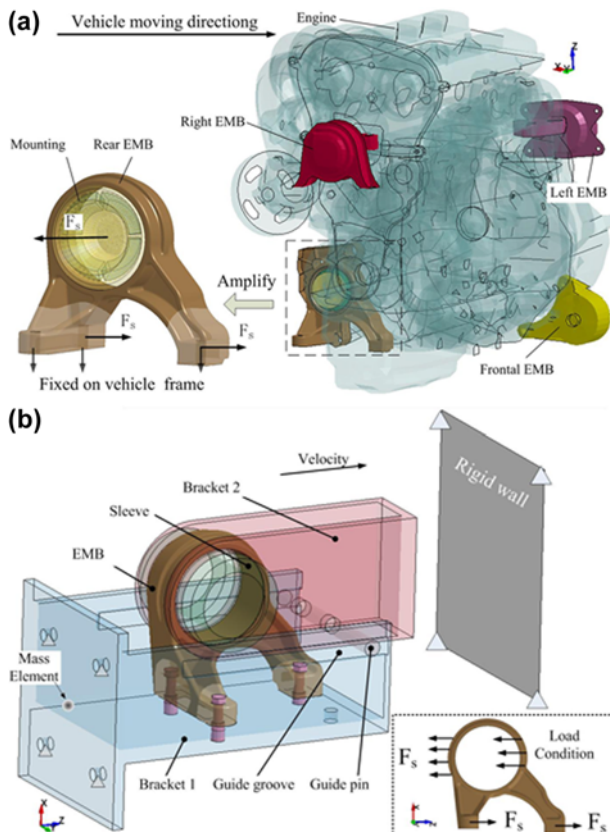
EMB under impacting load: (a) Relative position of EMB mounted in vehicle frame; and (b) FEM model of the assembly fixture and a magnified observation of the EMB.
